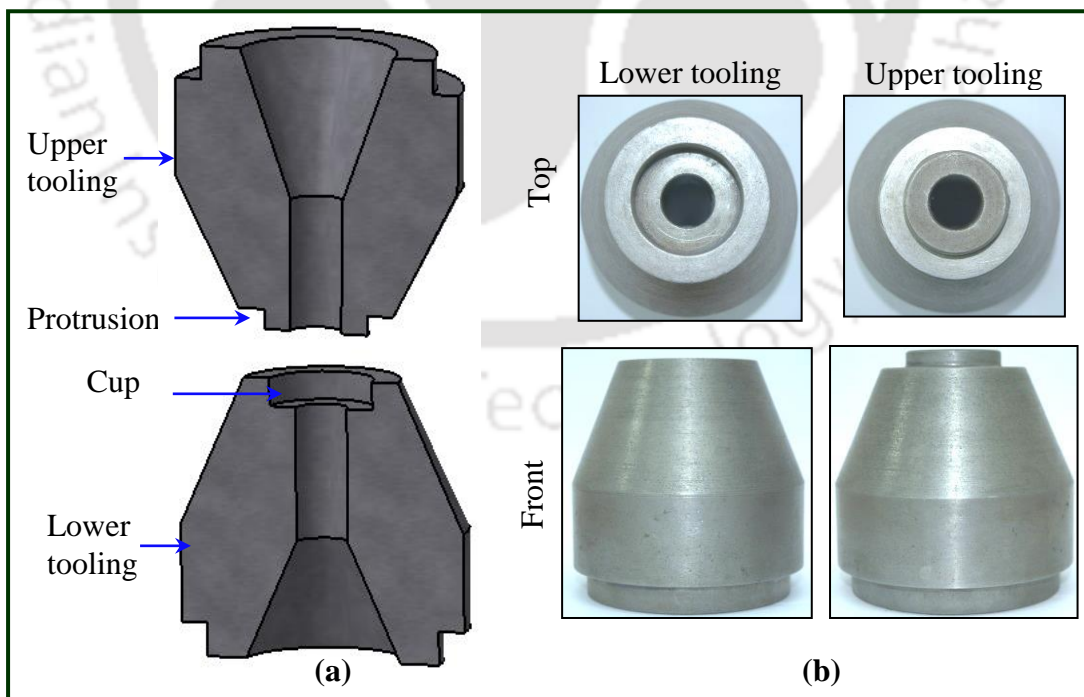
(a) 3-D model showing the cross section of the tooling (b) tooling to hold the workpiece.
